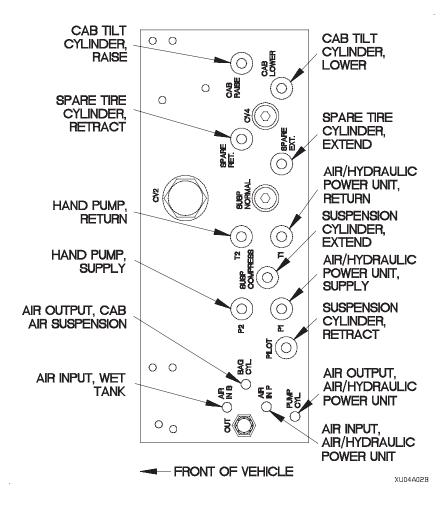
Hydraulic Manifold PN HFC32598 Rear View
